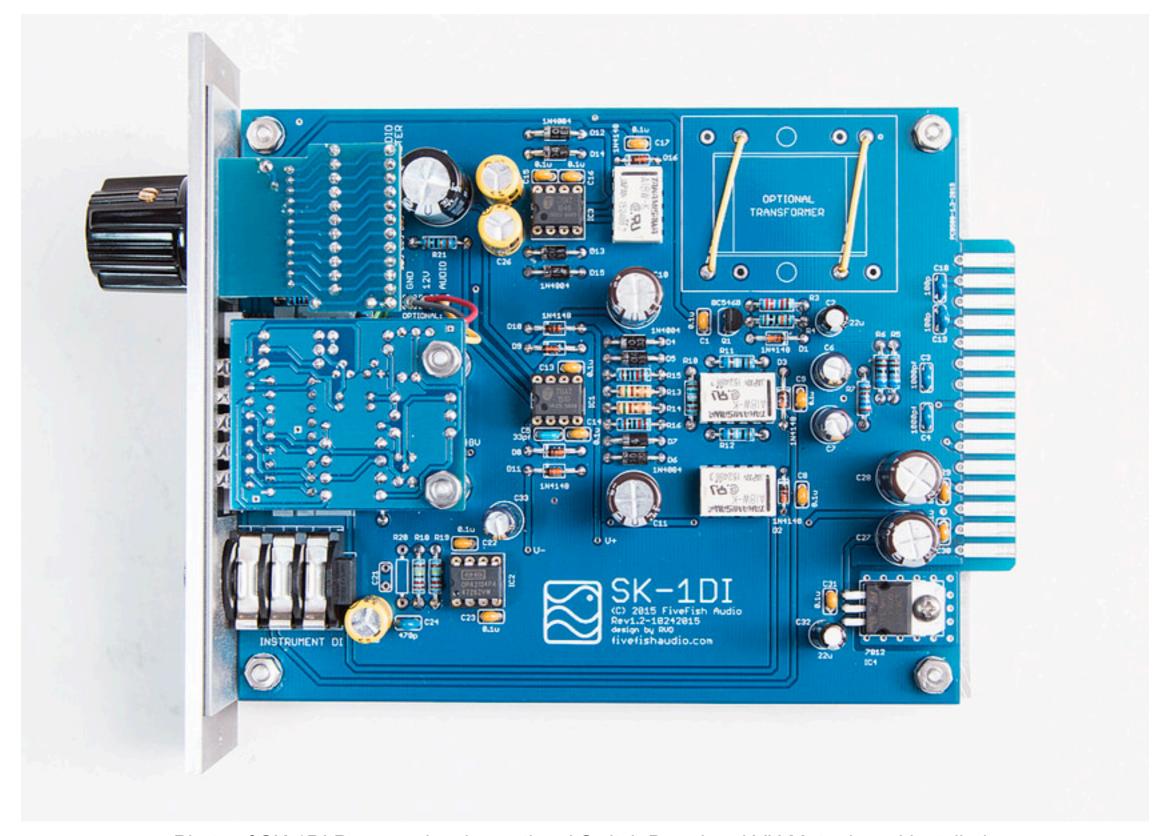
DI Preamp showing optional Switch Board and VU Meter board installed.
